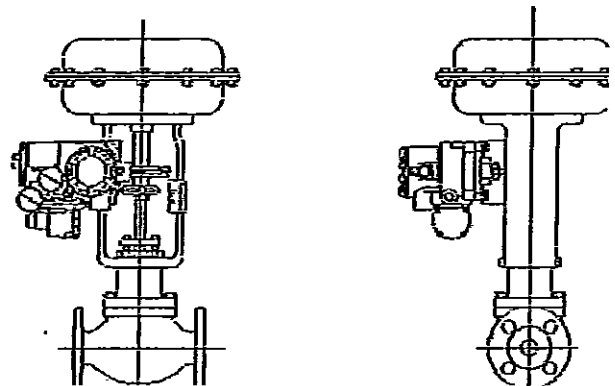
FVP Installed on Linear-motion Valve/Actuator
